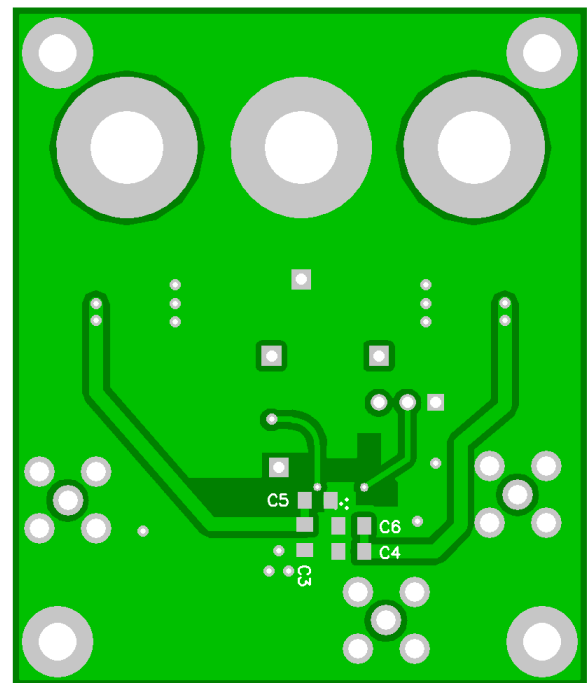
THS3110 EVM Board Layout (Bottom Layer)
